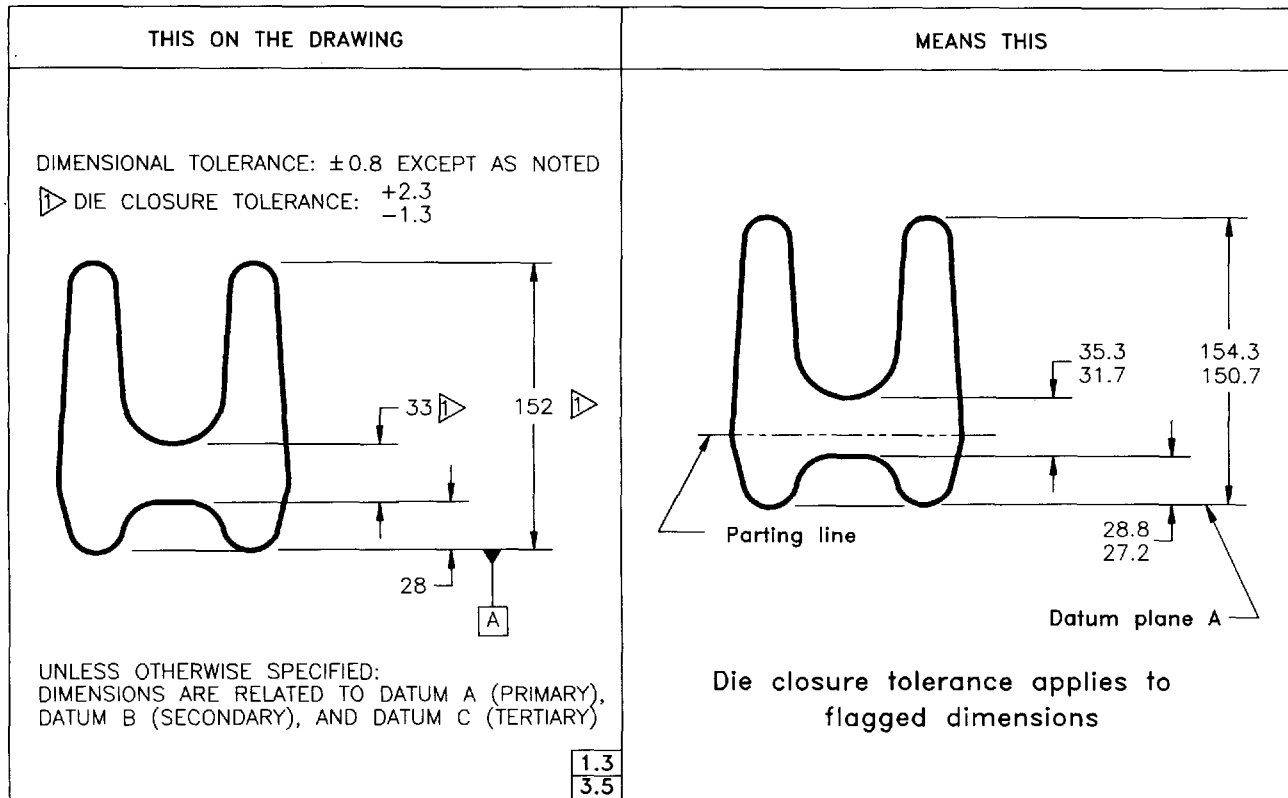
(c) DIE CLOSURE SPECIFIED AND PARTING LINE NOT INDICATED
